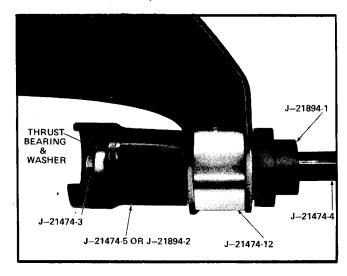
Installing Lower Control Arm Rear Bushing
